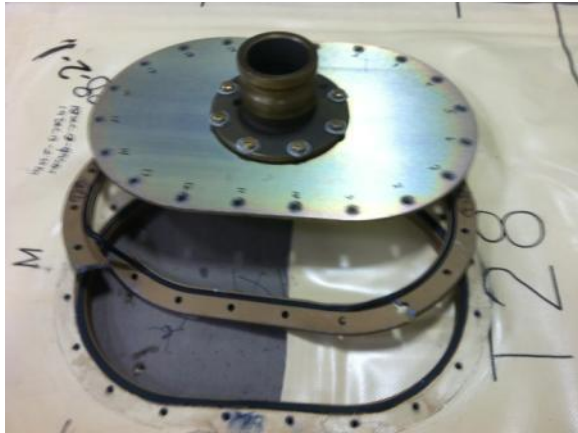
Close up of additional 50 durometer O-ring isolating peripheral scrim and bolt-holes from fluid path
